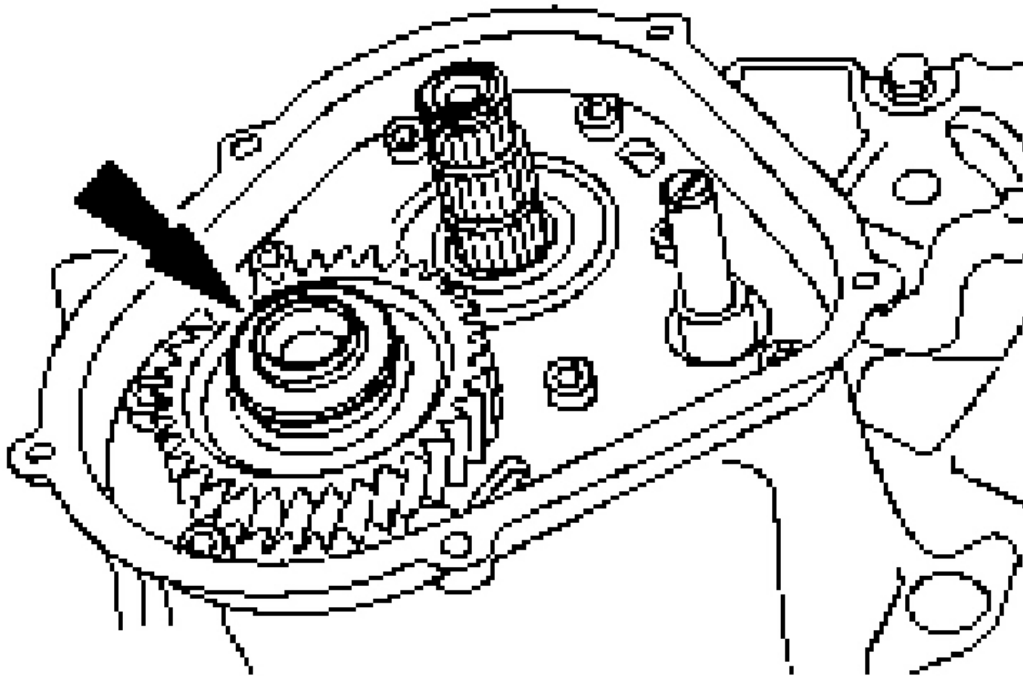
Disassembling Fifth Gear Synchronizer Unit
